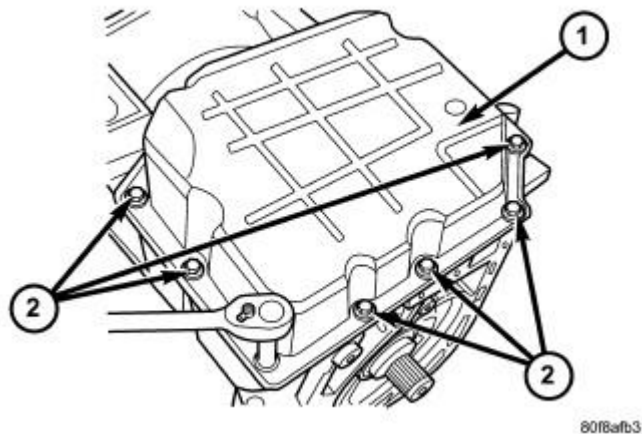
Remove/Install Transmission Oil Pan Bolts
